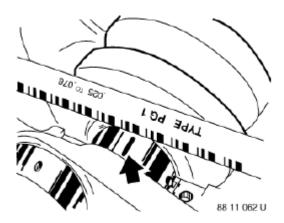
Checking Bearing Play Using Plastic Gauge Courtesy of BMW OF NORTH AMERICA, INC.
